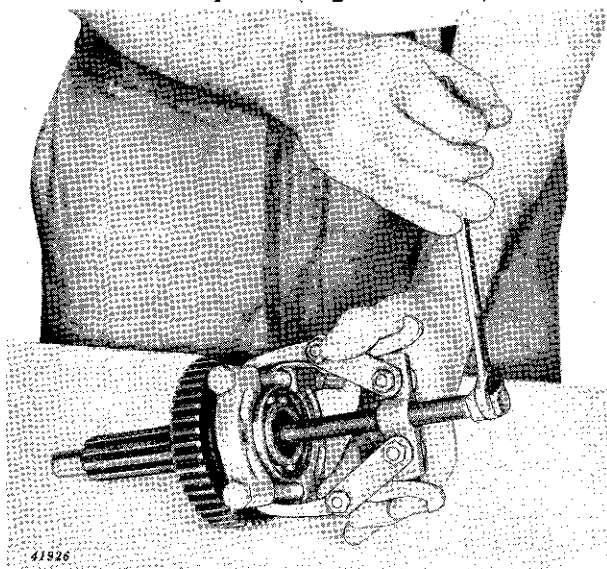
Removing Transmission Drive Shaft Bearing
